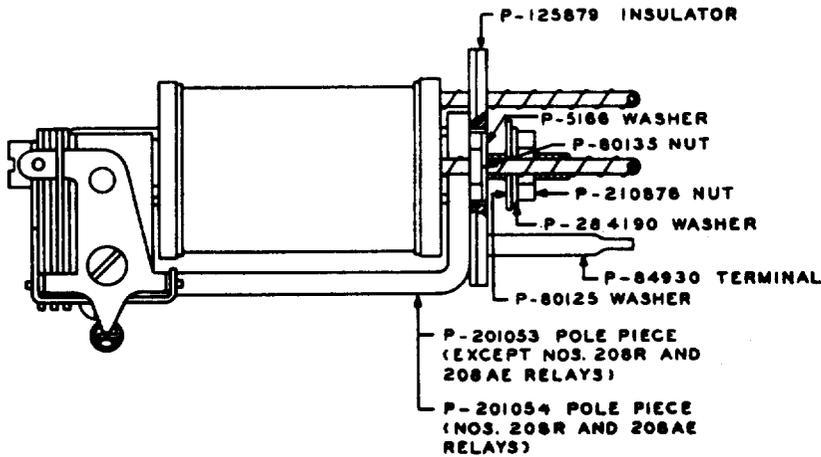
208-type Relay With Fillister Head Contact Assembly Screw
